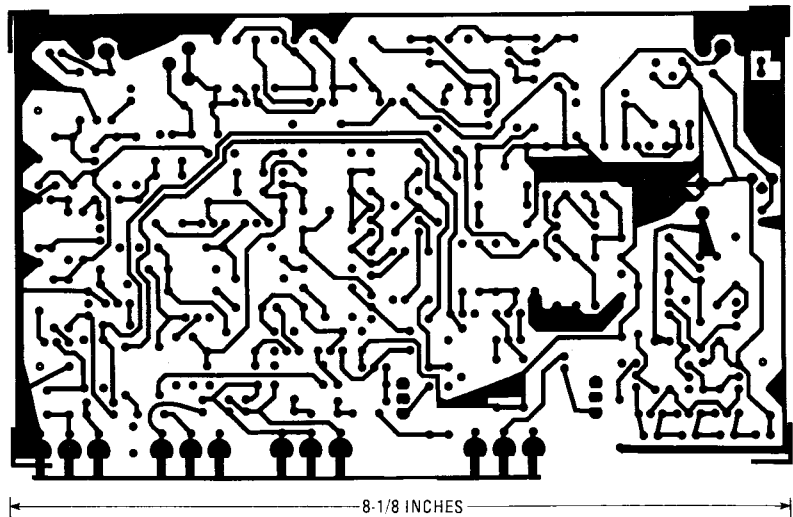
THE FOIL SIDE of the board is shown here half size.
